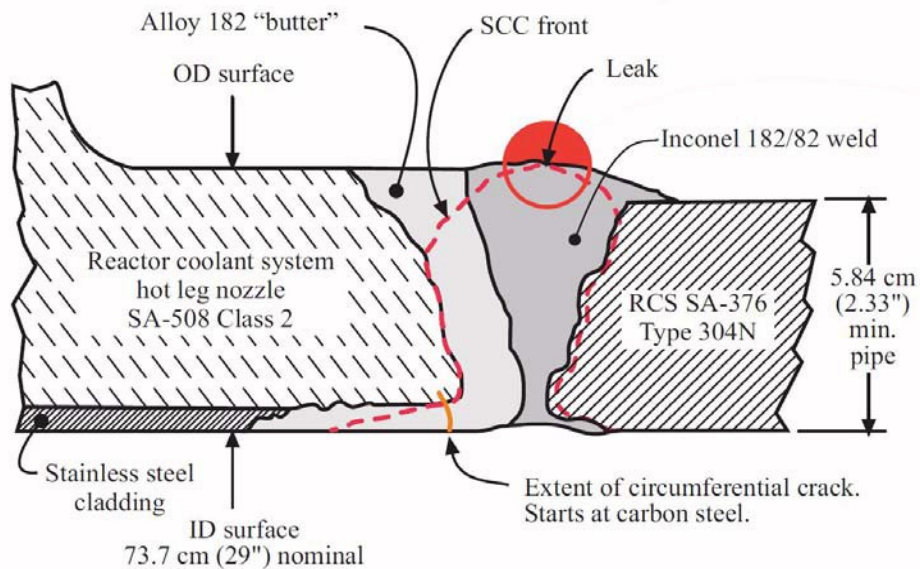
Schematic of the Alloy 182 weld used to join stainless steel piping to the RPV nozzle.
